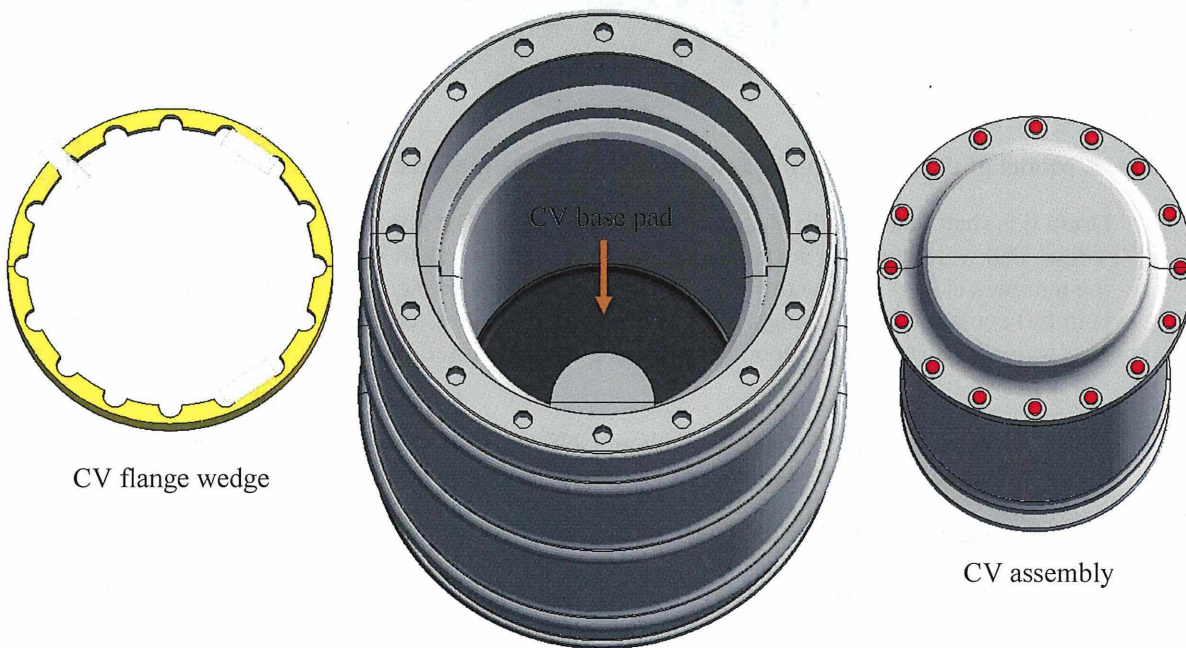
Model of test fixture assembly and PCC pads loaded in the CV.
